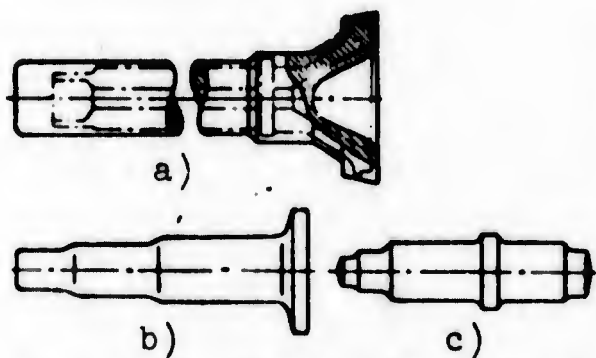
Shaft blanks. a) turbine shaft; b) reduction gear shaft; c) turbopump assembly shaft.
